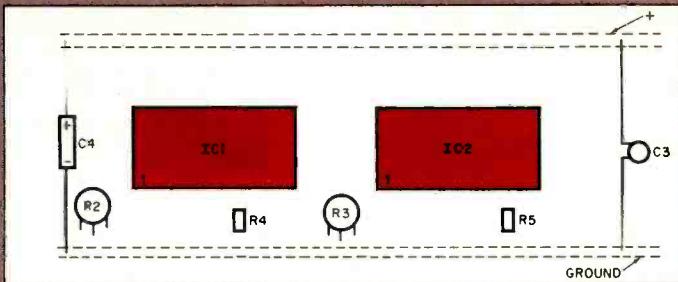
In lieu of a custom printed circuit board, the LED driver can be mounted on a universal breadboard as shown here.
